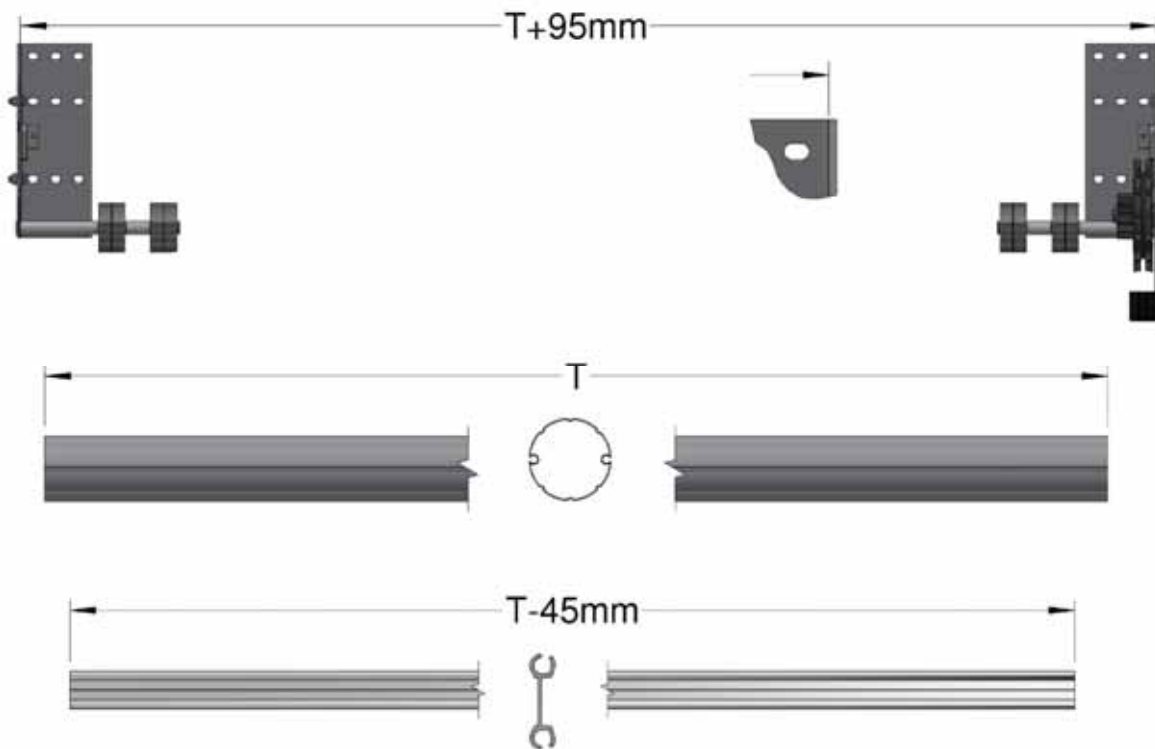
, Top Bracket Spacing When Not Cutting Tube
